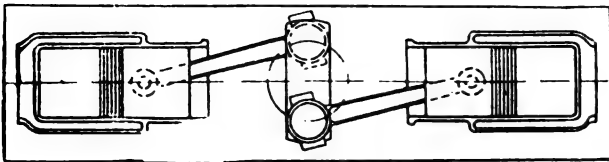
A Two-Cylinder Opposed Motor, the Type Being Exceedingly Well Balanced.
